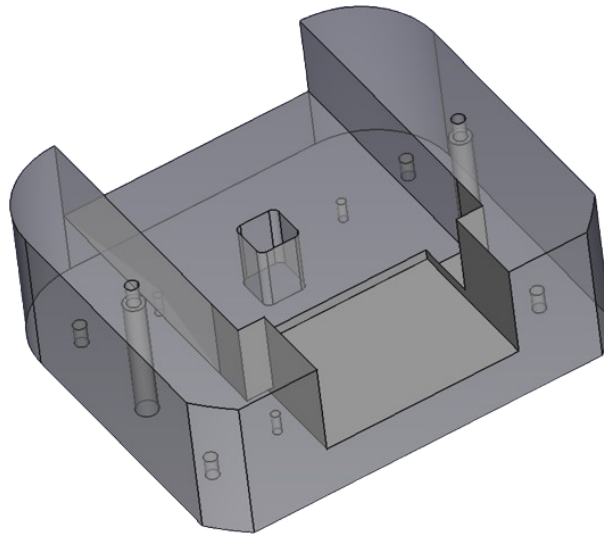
The CAD for the upper, outer shielding block for the new setup.
